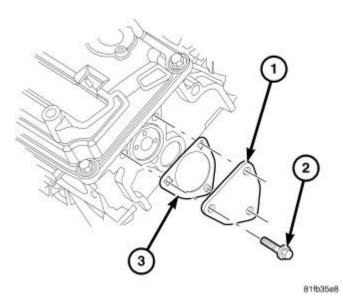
Cam Thrust Plate, Gasket & Bolts Courtesy of CHRYSLER LLC
